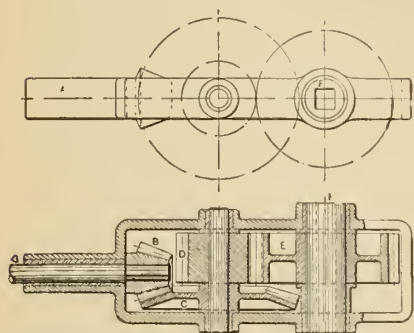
Right-hand Power Head for Drilling and Reaming.
